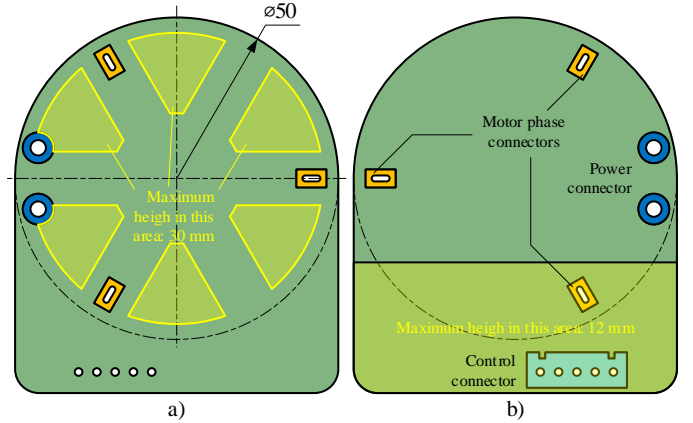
PCB constraints: a) Motor side; b) opposite side.
